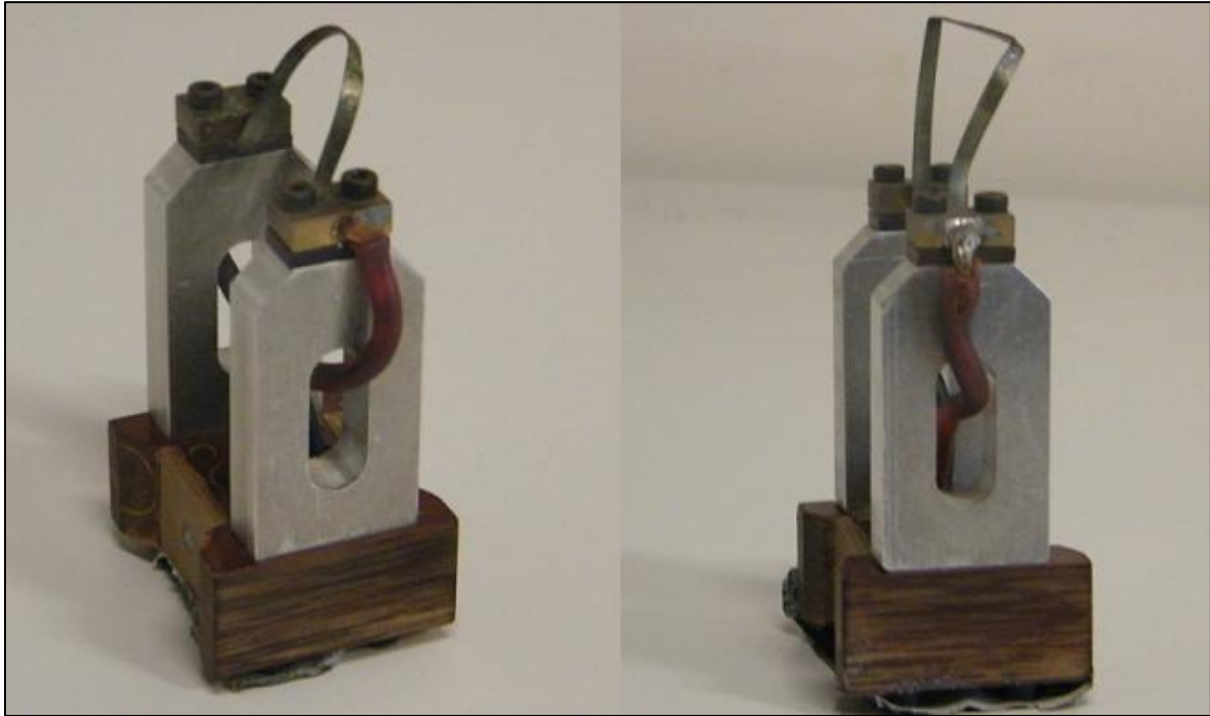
Failure modes of multi-pass cutting tools (Bending Failure on the left, Torsion Failure on the right)
